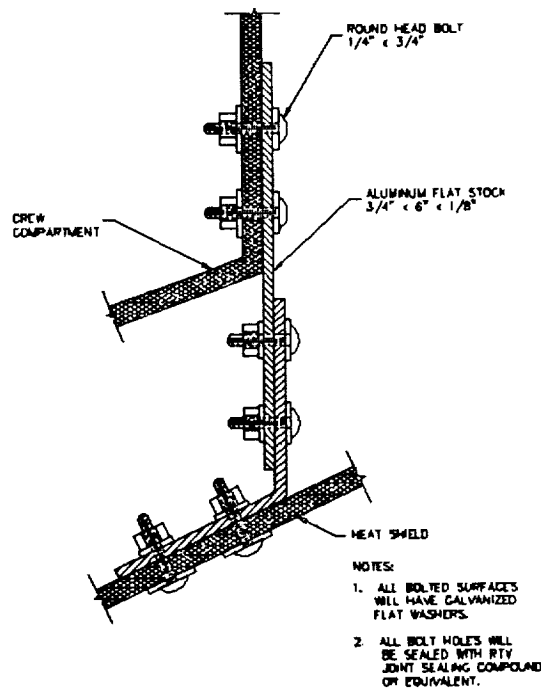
Crew Compartment Heat Shield Joint
